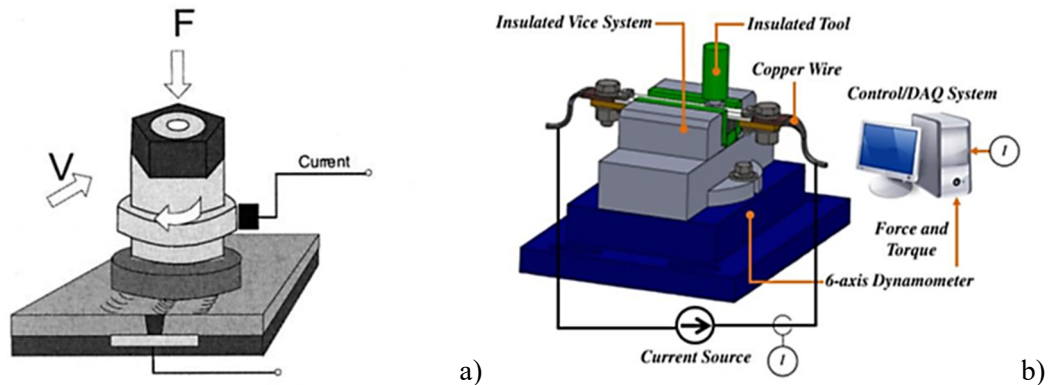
Schemes of EAFSW with tool integrated in the electric circuit (a) [45] and without (b) [46]
